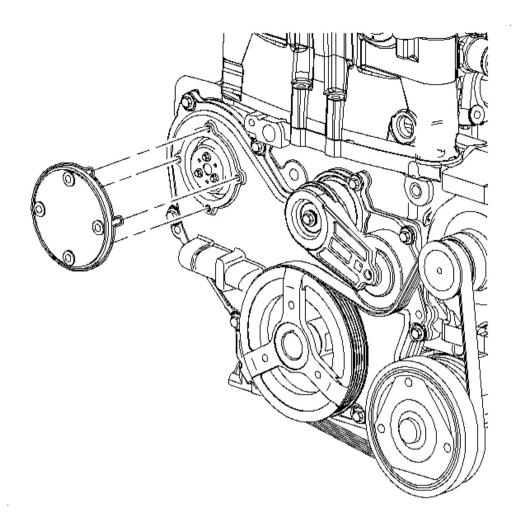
View Of Water Pump Access Plate From The Front Cover Courtesy of GENERAL MOTORS CORP.
